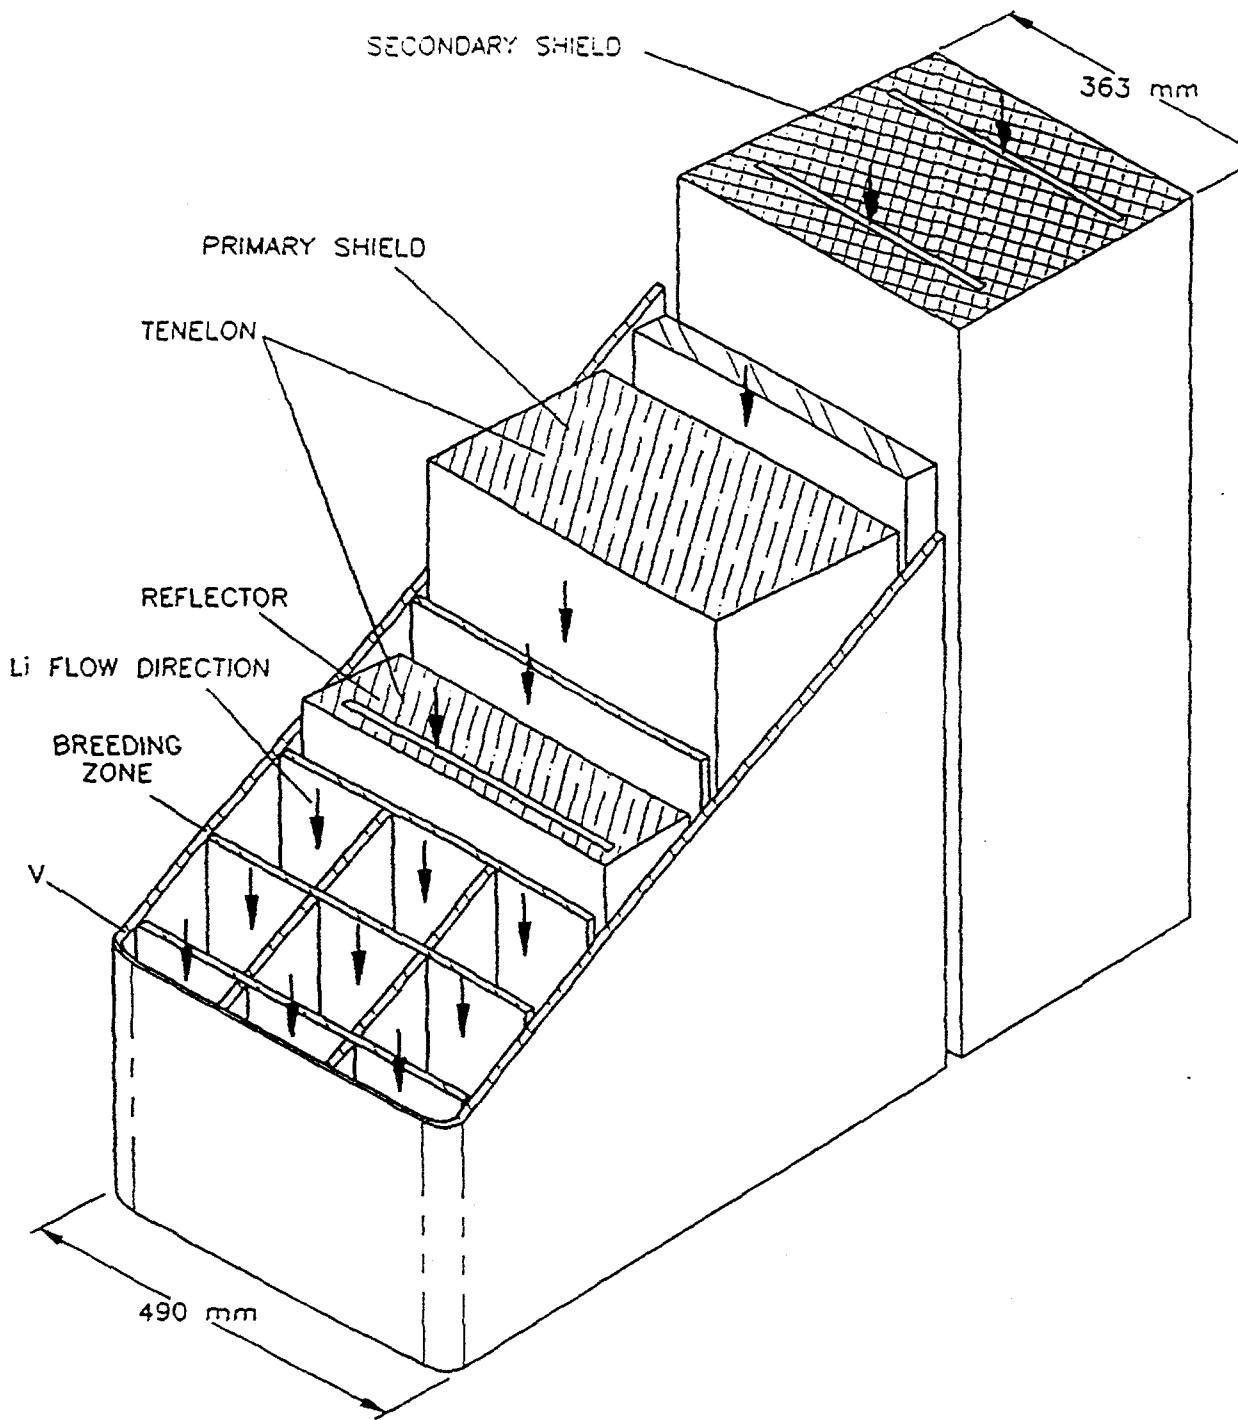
Cutaway View of Vanadium/Lithium Demo Inboard Blanket/Shield Segment.
